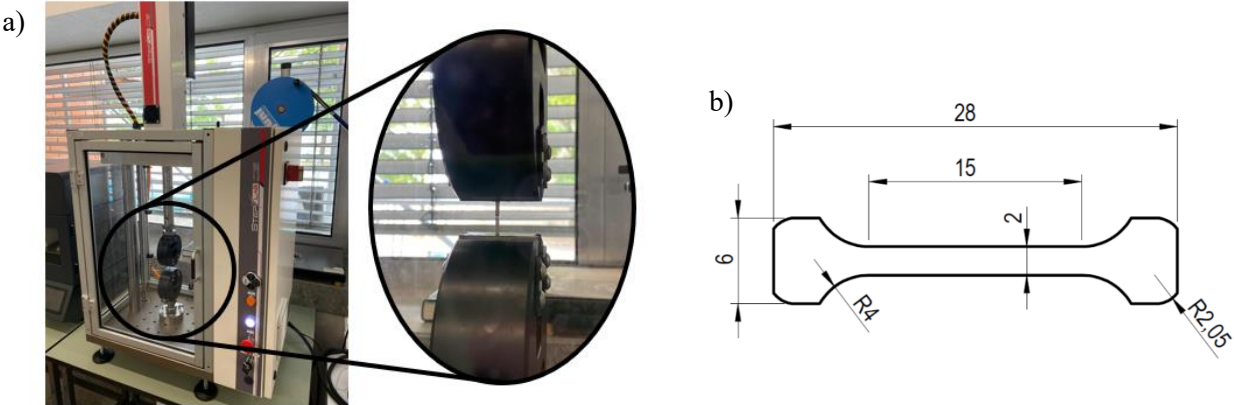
Uniaxial Tensile Tests: a) Equipment used; b) Technical drawing of the tested specimens.
